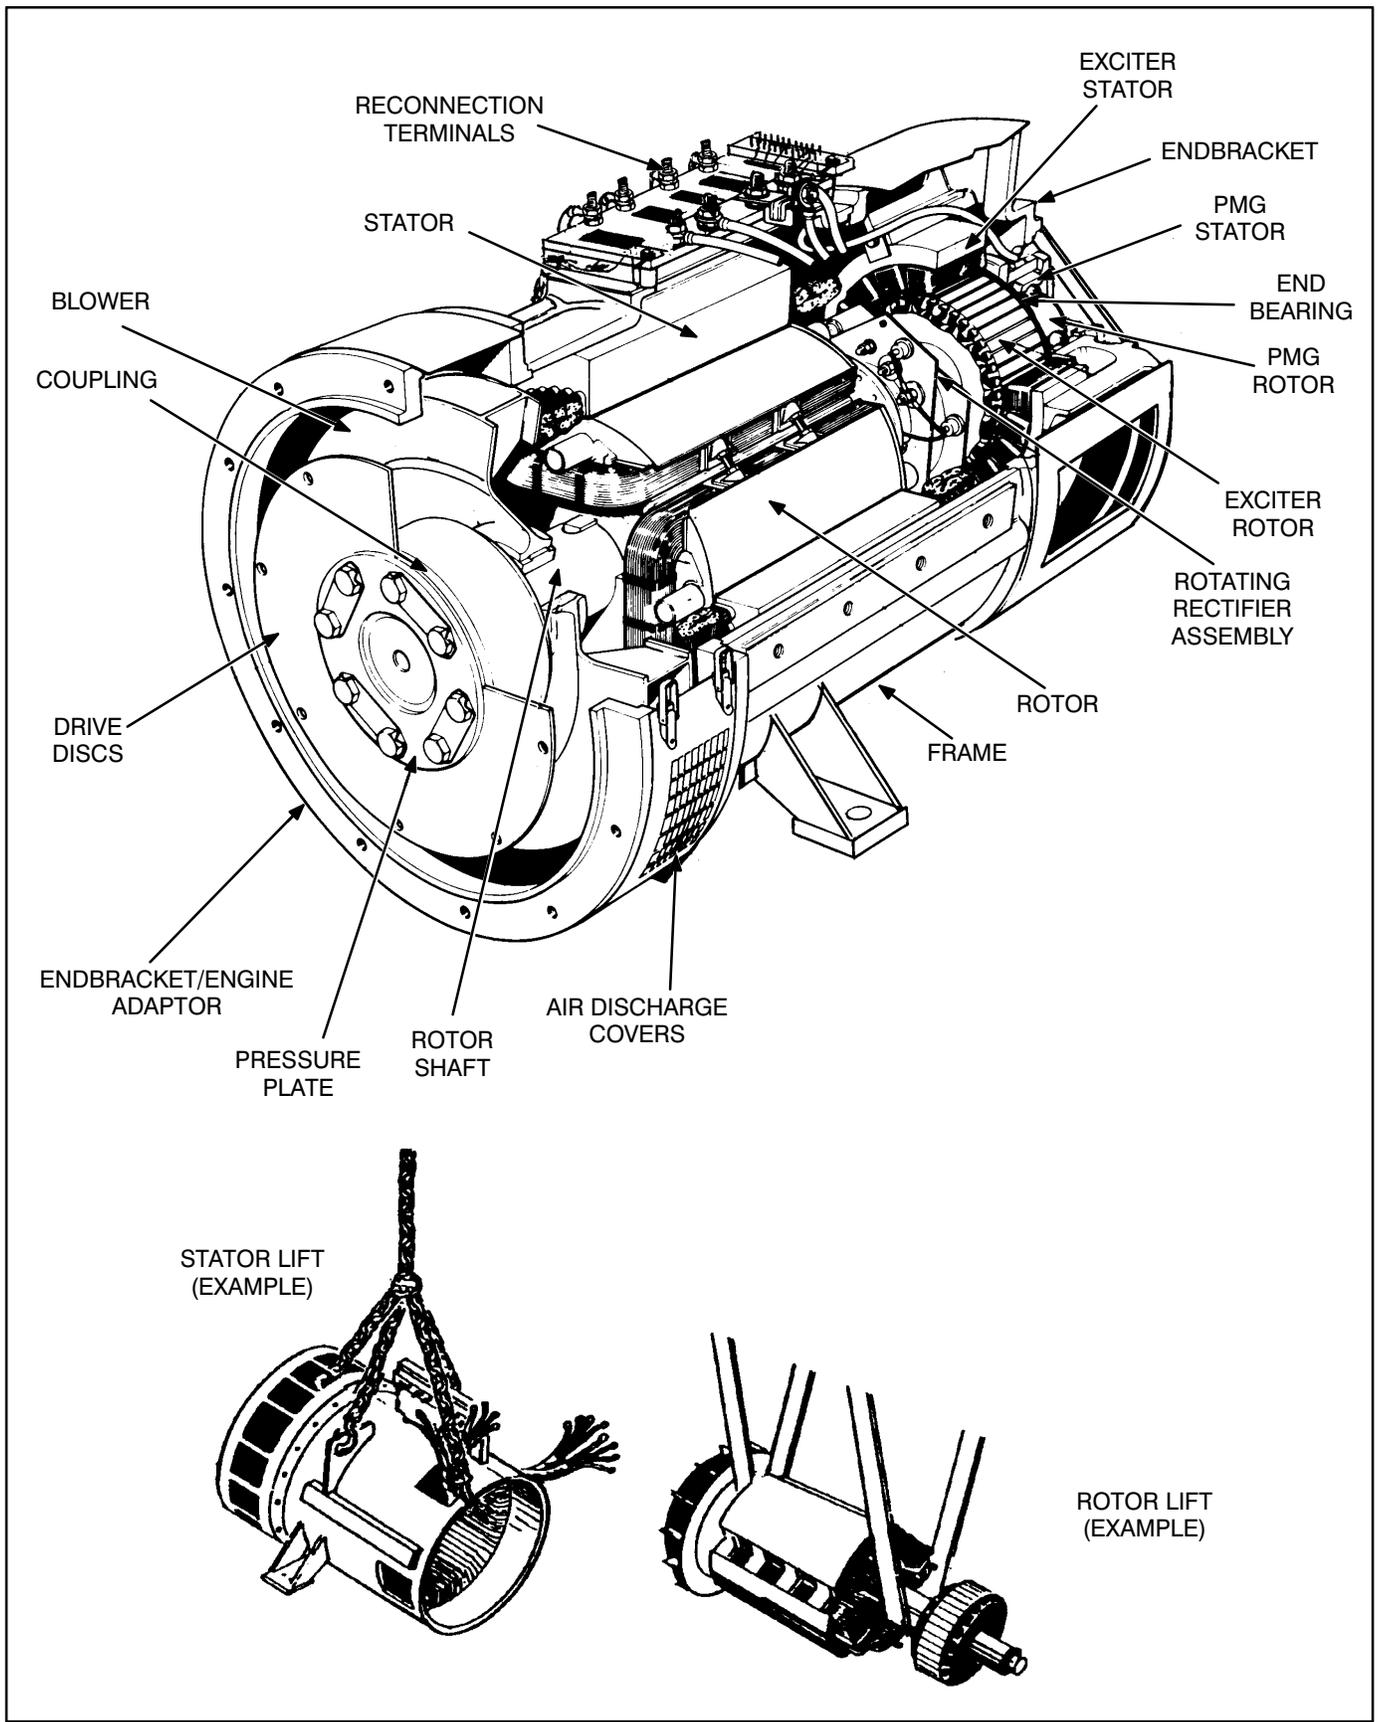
TYPICAL GENERATOR ASSEMBLY
